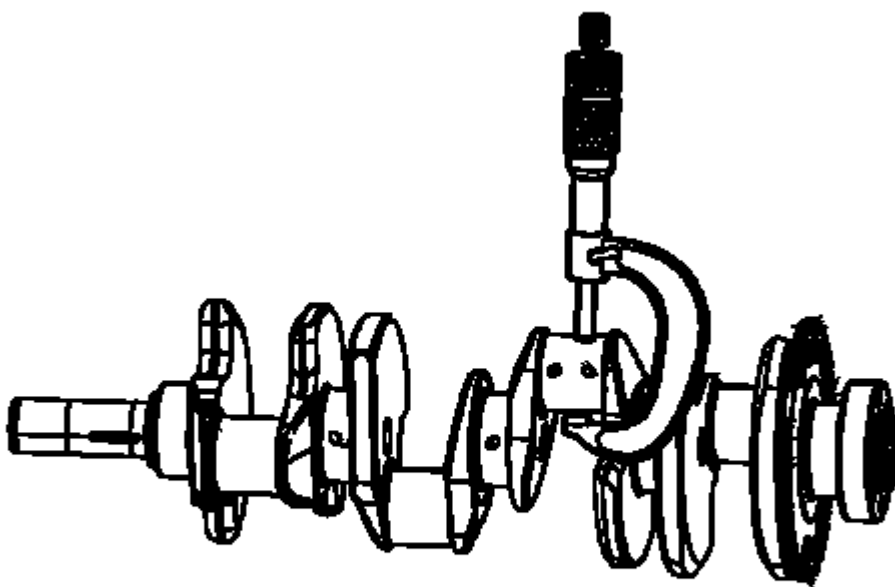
Measuring Connecting Rod Journals For Out-Of-Round And Taper
